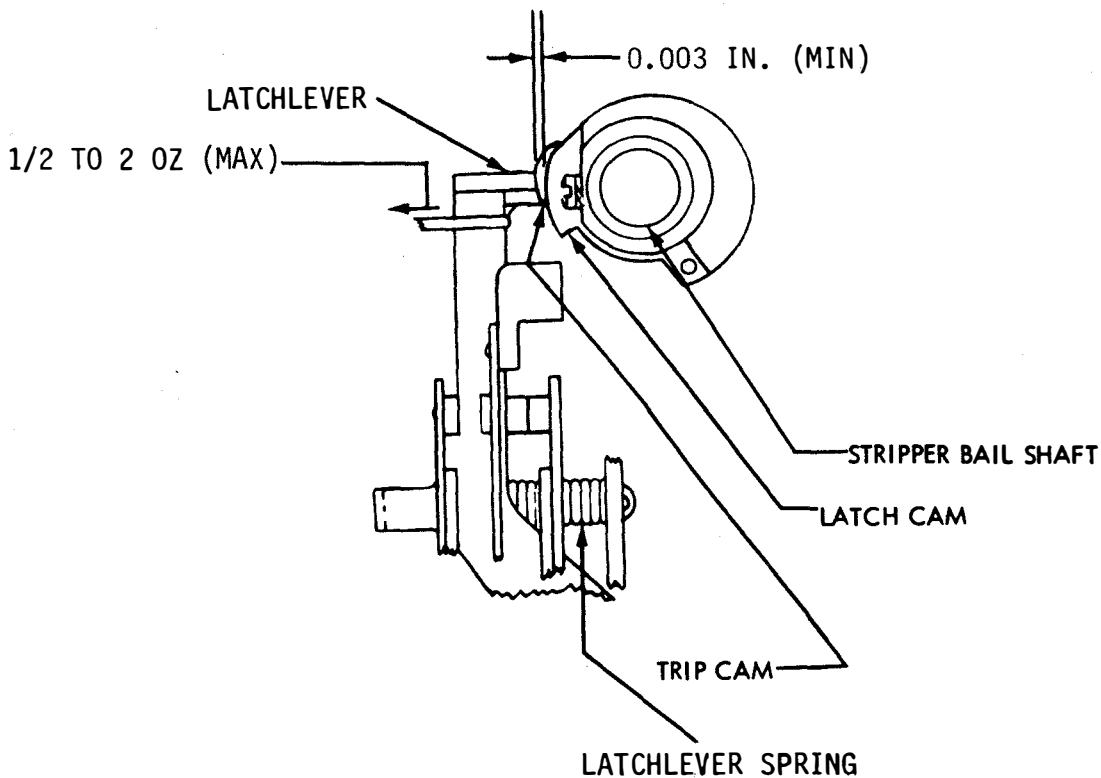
Latchlever Spring and Trip Cam, Right Rear View
